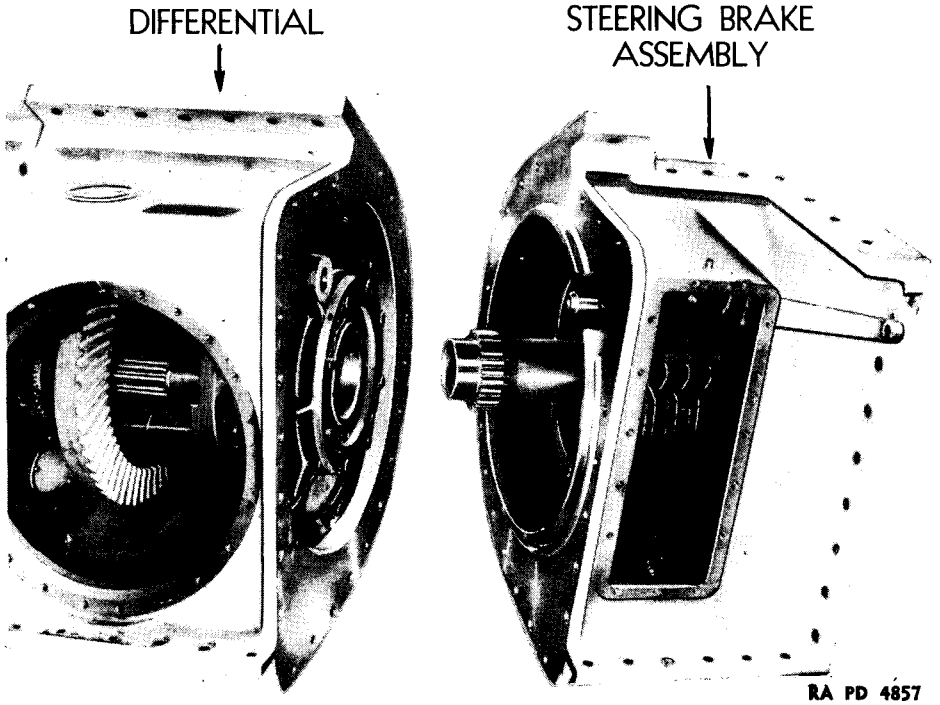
REMOVING STEERING BRAKE ASSEMBLY
